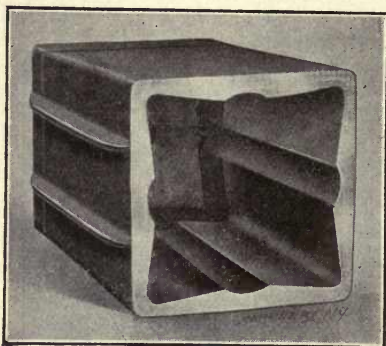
Large Steel Casting Broached as Illustrated in Figs. 20 and 21
